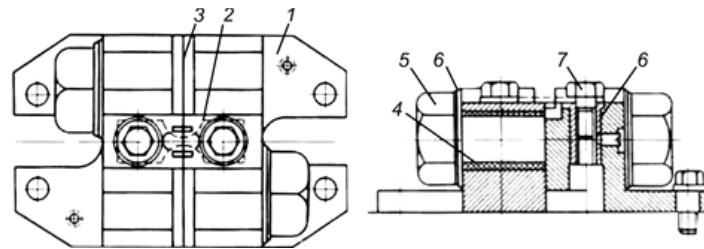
Device for fixing of the corset specimen: 1 - dies; 2 - fixed specimen; 3 - isolating mica separator; 4 - fluoroplastic sleeves; 5 –tightening dies bolts; 6 – isolating washers; 7 - bolts for specimen fixing.
